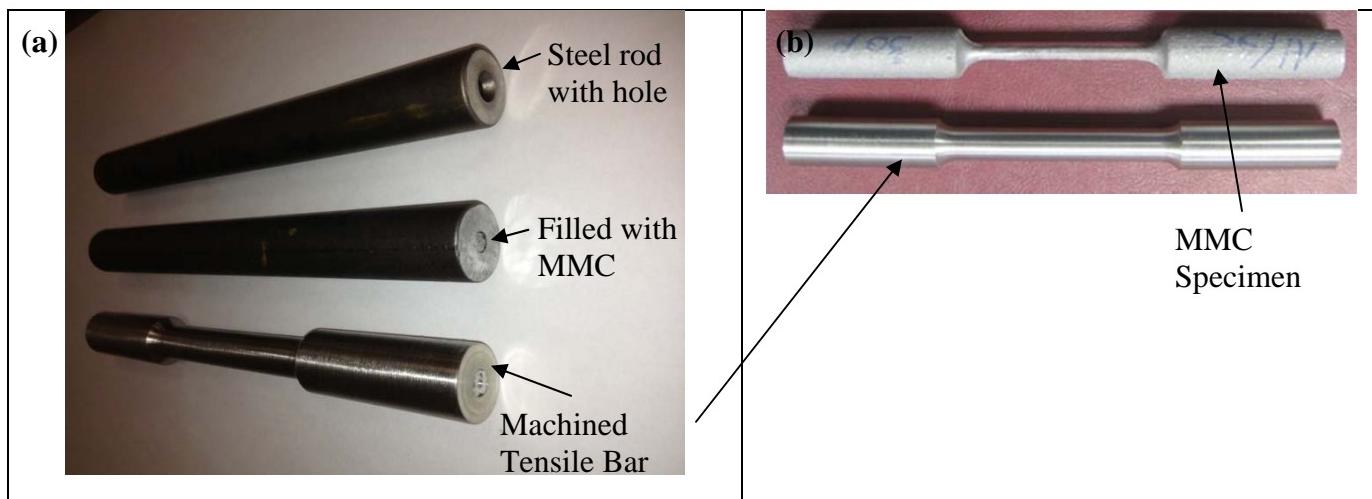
(a) Steel rod with hole for casting macro-composite tensile bars, (b) Steel rods with MMC cast in the center, (c) Macro-composite tensile specimen after machining (left) and as-cast MMC dog bone specimen (right).
